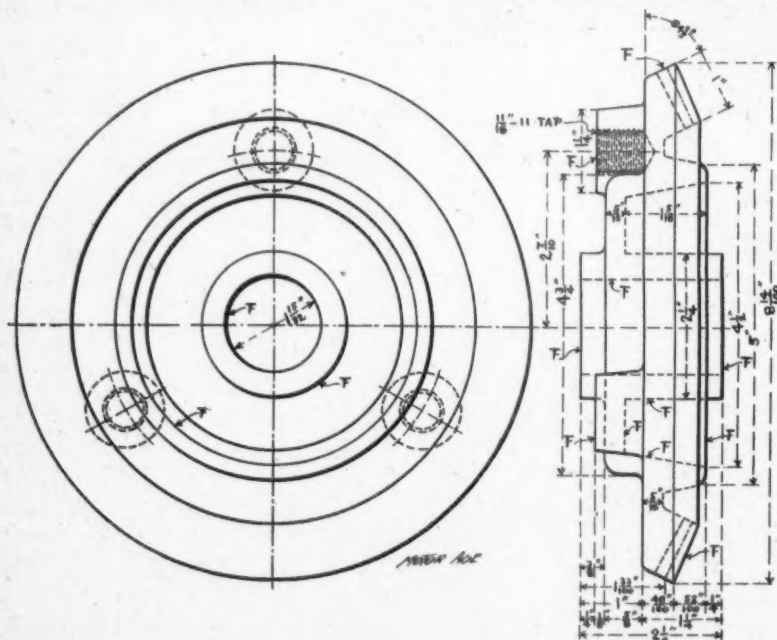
LEFT HAND BEVEL GEAR BLANK (RIGHT HAND IN FIG. 11).
